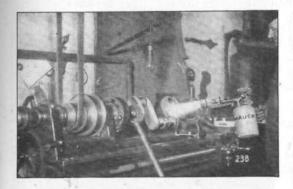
Hauck Torch No. 14 heating a twisted crank shaft for straightening in lathe. A piece of sheet iron was placed in back of the crank shaft for confining the heat.
